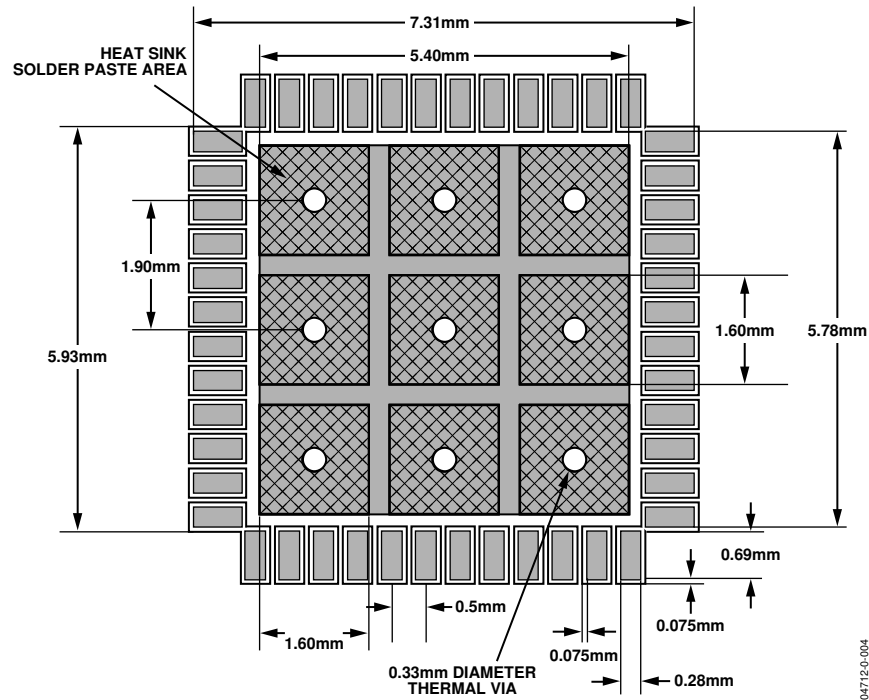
48-Pin LFCSP (CP-48) Land Pattern—Dimensions shown in millimeters
